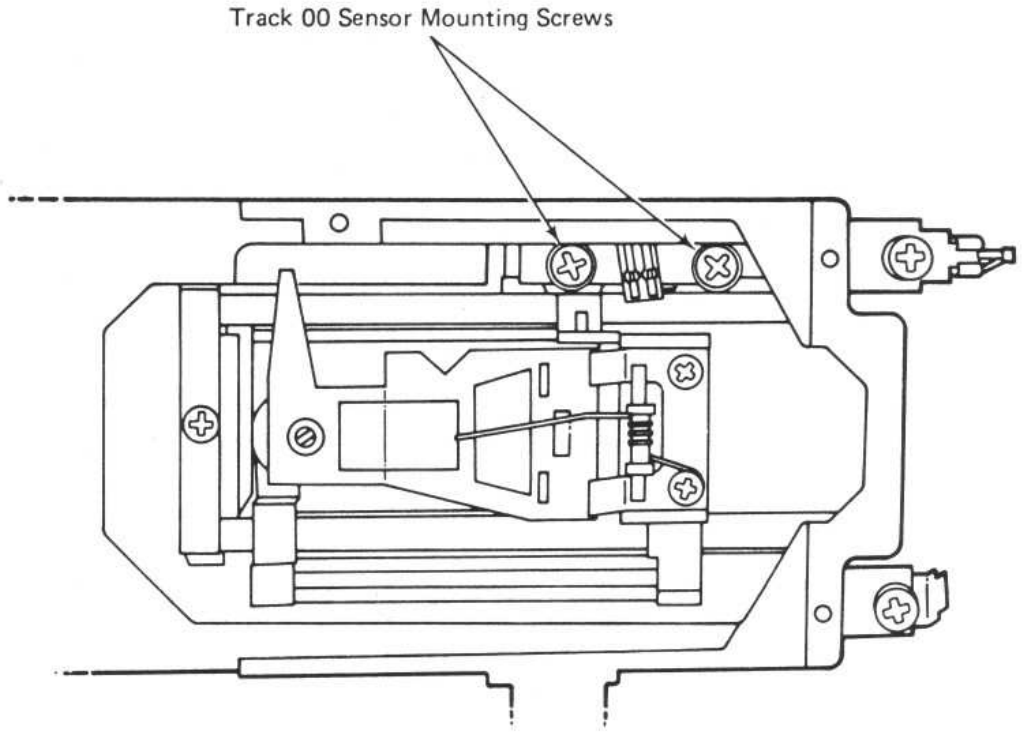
TRACK 00 ASSEMBLY (MPI)
